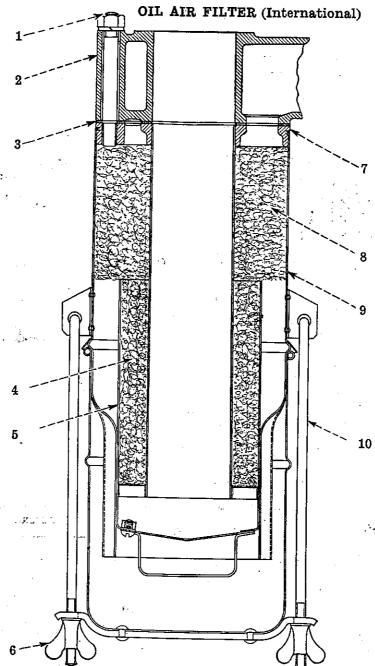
Illustration No. 67—Oil air filter (16466DAX) (sectional view).
